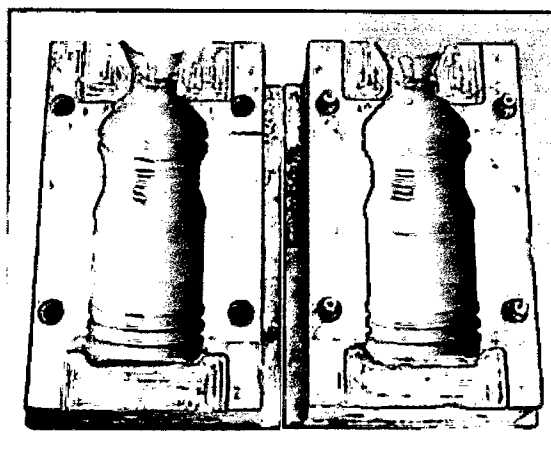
Common type of Extrusion blow mold (Made of P20 steel), (Kenplas plastic mold, URL: <http://www.kenplas.com/mold/preformmold/>)
